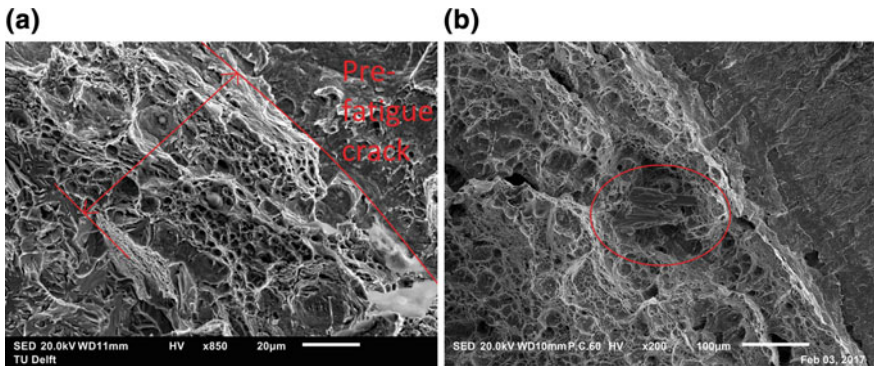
Room temperature fracture surface showing a voids next to the fatigue crack of rotation bending specimen; b local cleavage zone in compression-compression specimen
